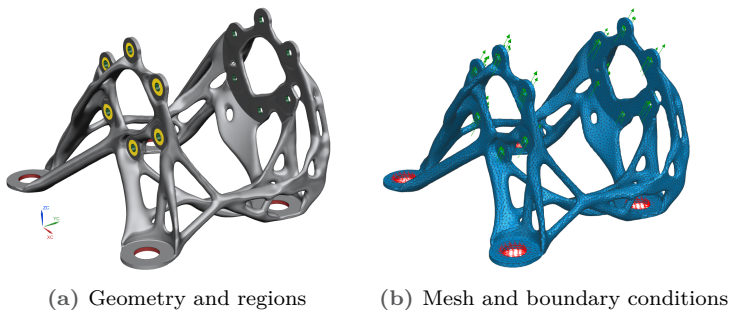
Geometry of the gearbox mount, optimized for 3D printing.
